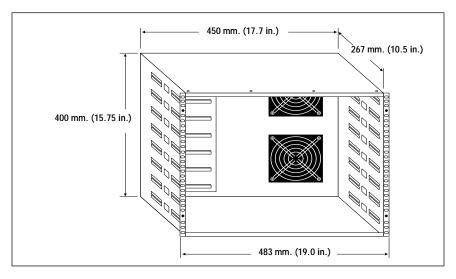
Seven- and Eight-Slot Rackmount Chassis Dimensions
